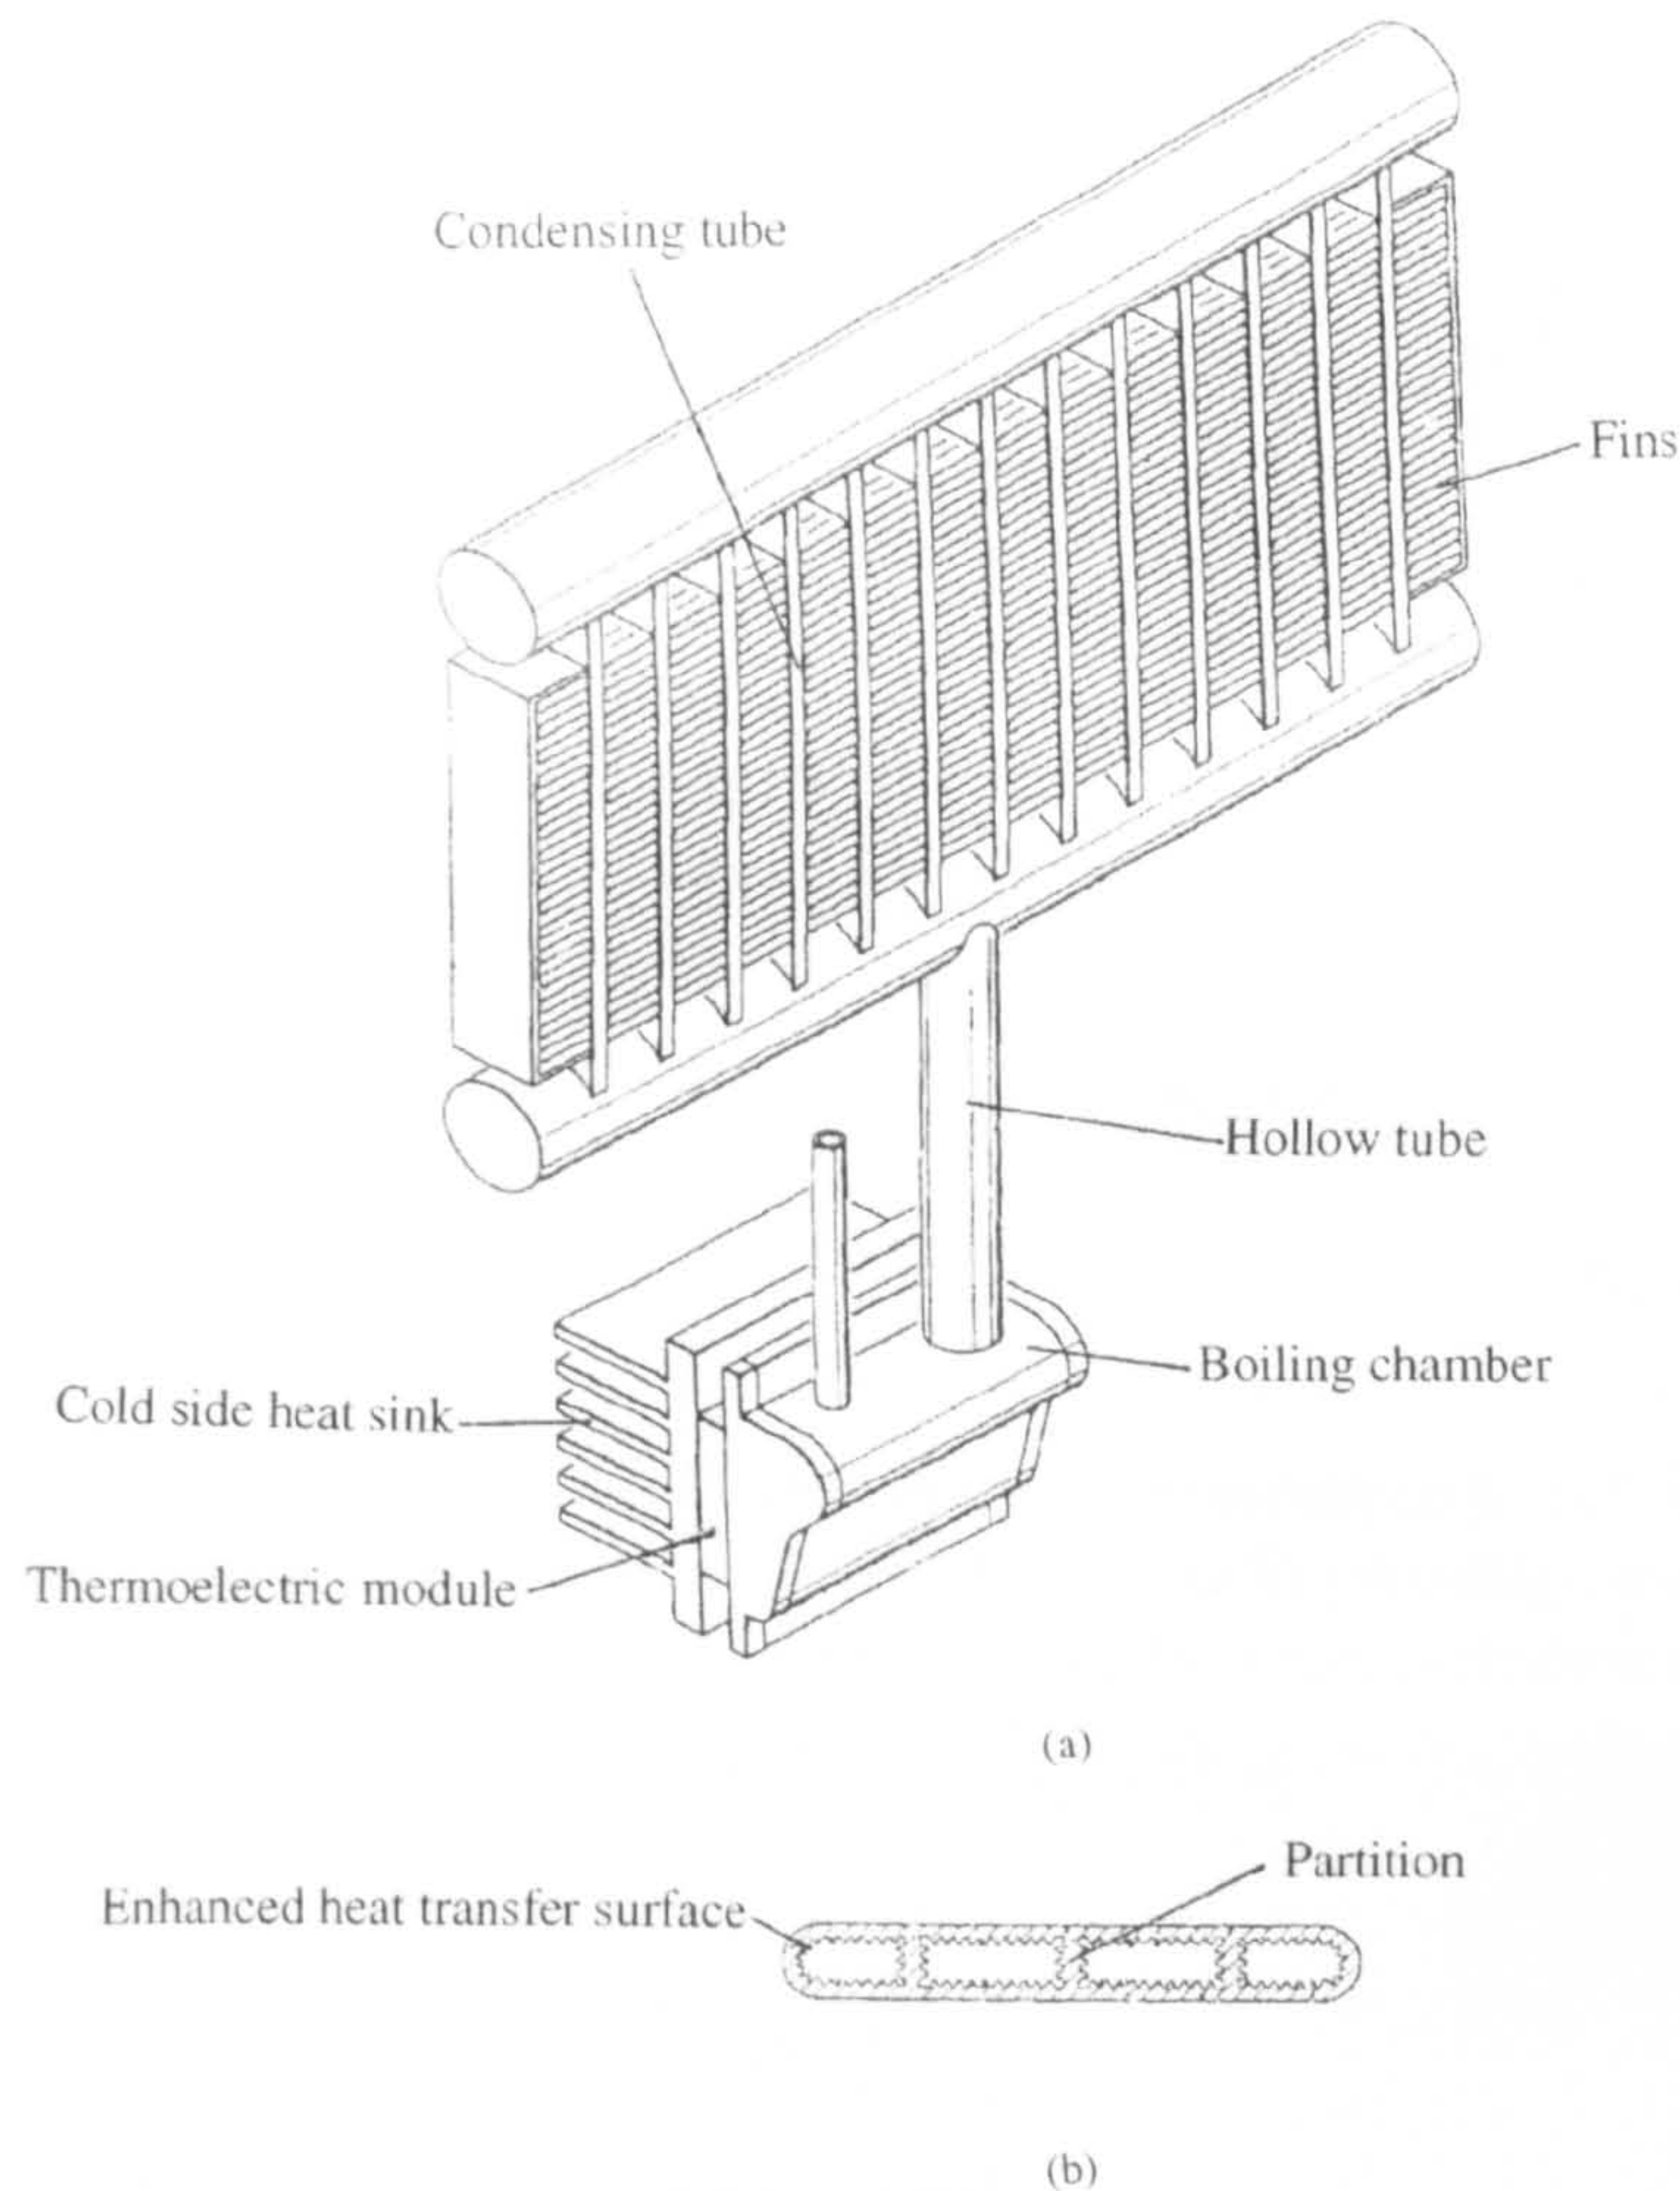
(a) Air cooled, thermosyphon reboiler-condenser assembly (b) Cross-section of the hollow condensing tube with enhanced heat transfer surface [Gilley et al, 1999]
